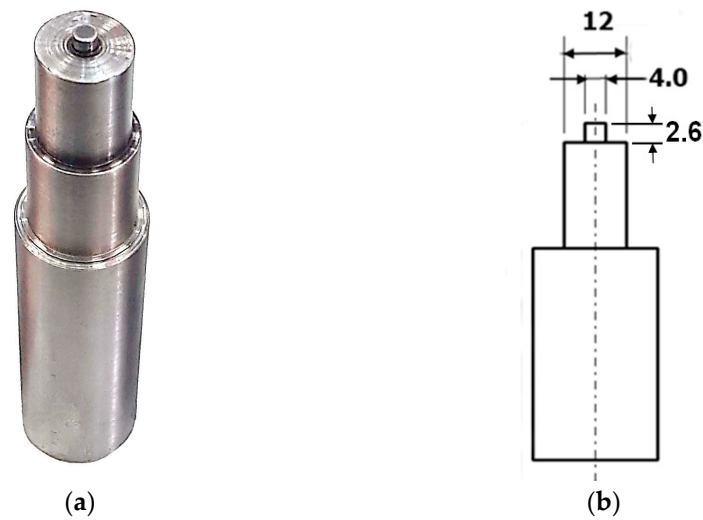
The FSSW tool: (a) shape and design and (b) schematic illustration.
